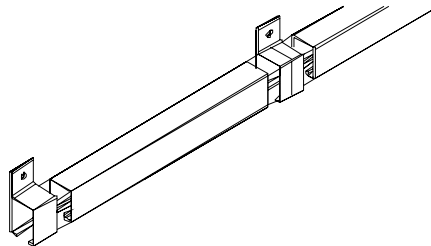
SLIDING DOOR - TRACK ASSEMBLY
